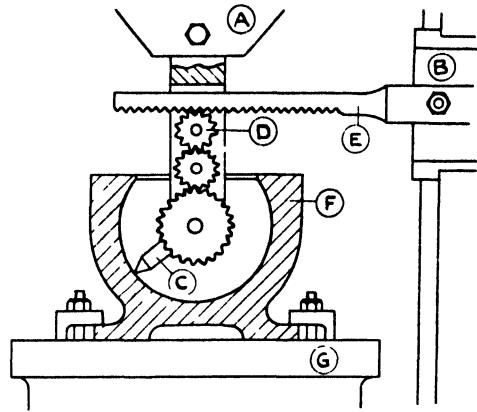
SPHERICAL INTERNAL BORING FIXTURE
